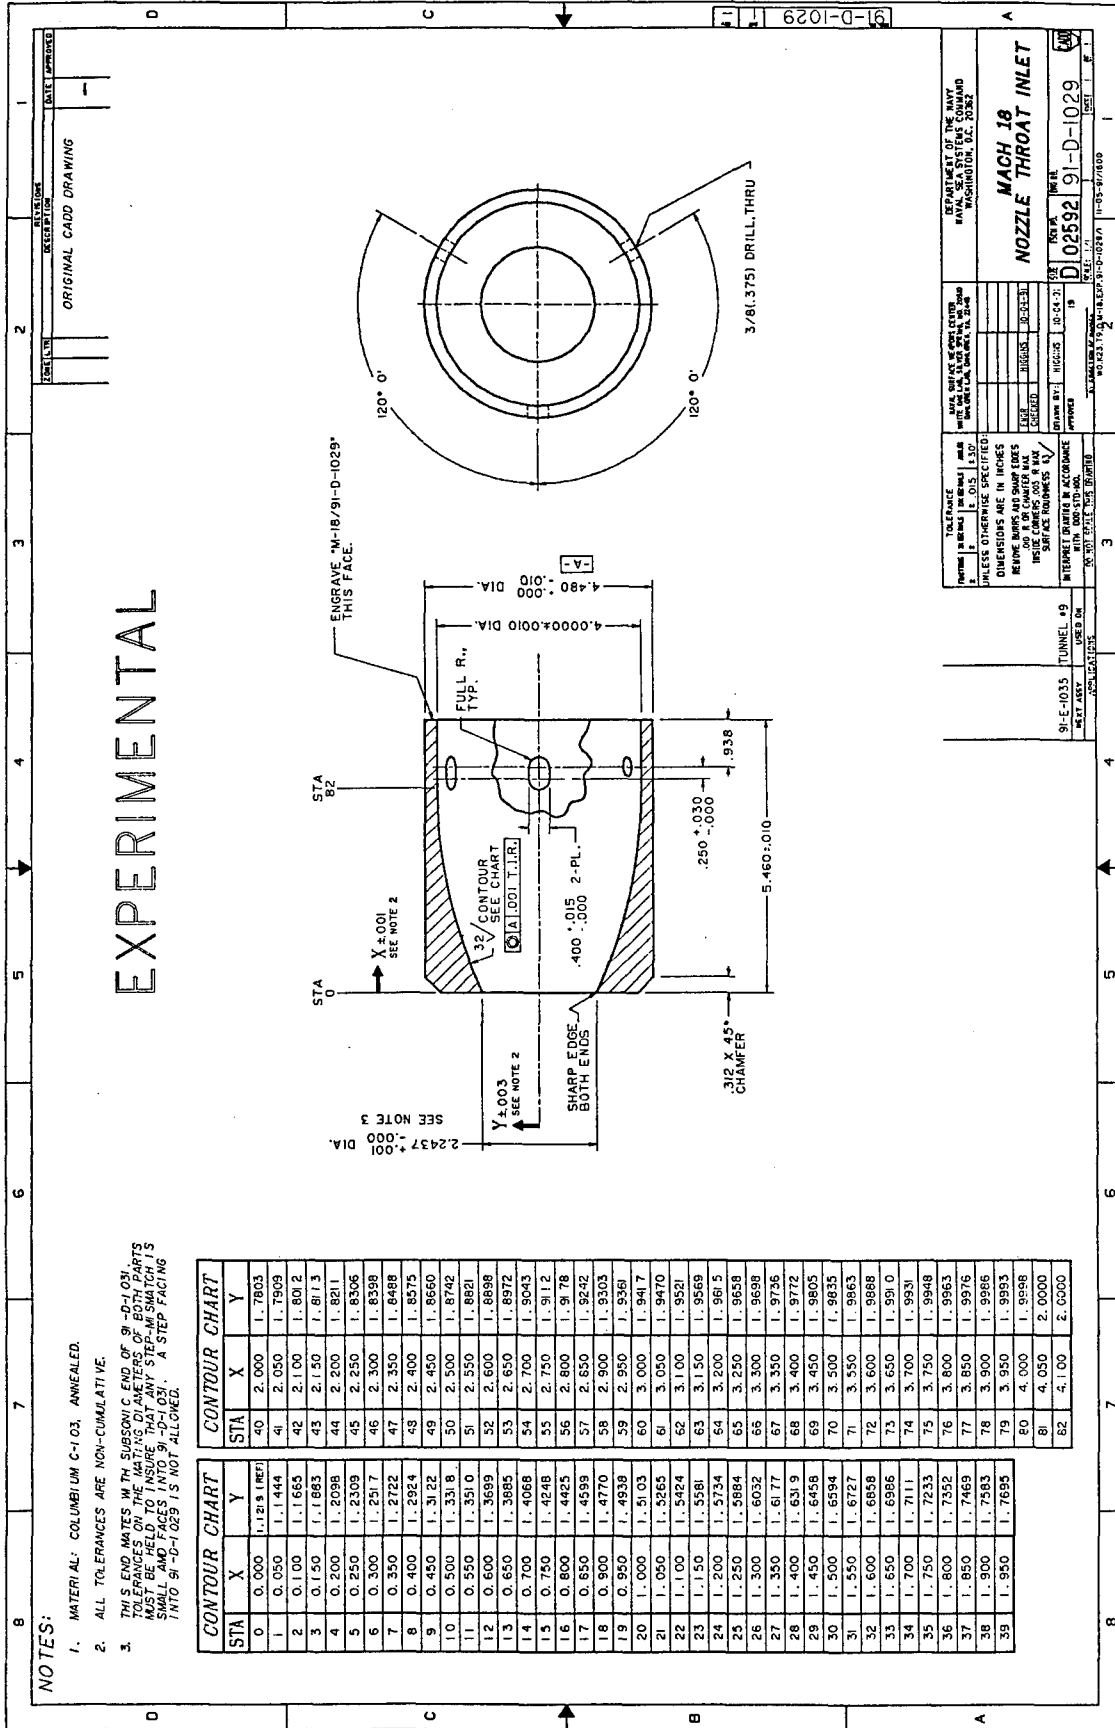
MACH 18 NOZZLE THROAT INLET SECTION
